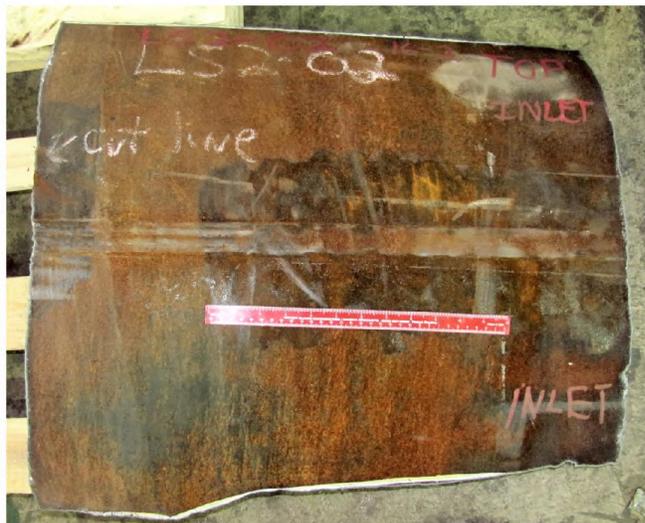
Un-packaged 6600E heat exchanger with area marking for removal in two pieces
